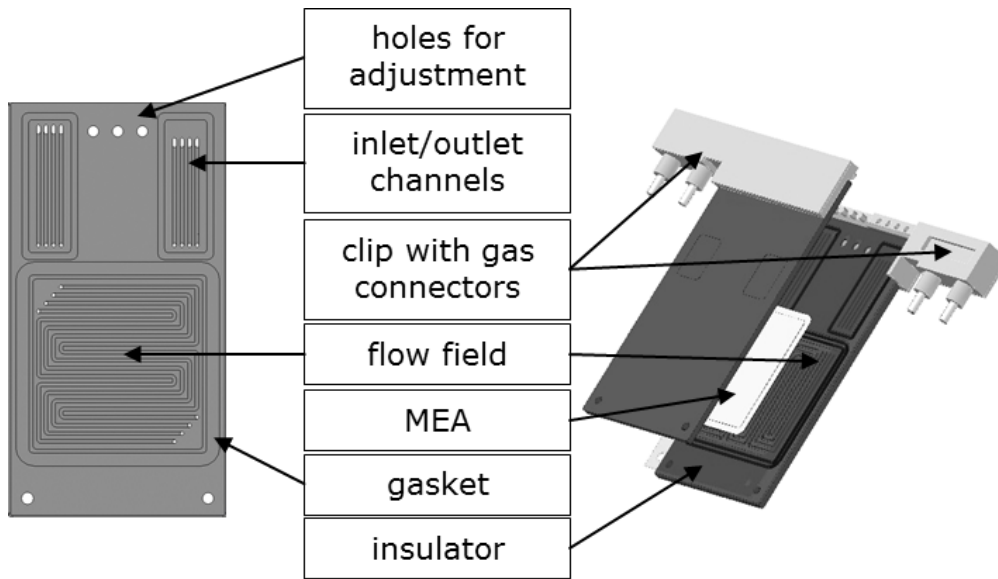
Schematic drawing of a PEMFC test cell (left: front view of a pole plate; right: explosion drawing of a test cell)
